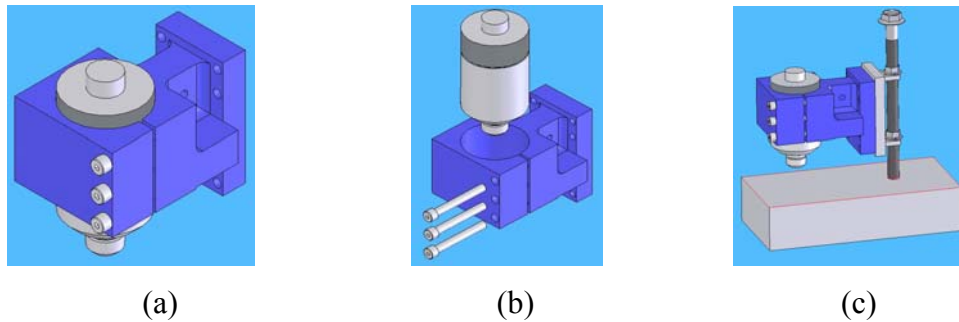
Spindle holder; (a) Assembly with spindle (b) Exploded view (c) Z-axis elevation mechanism
